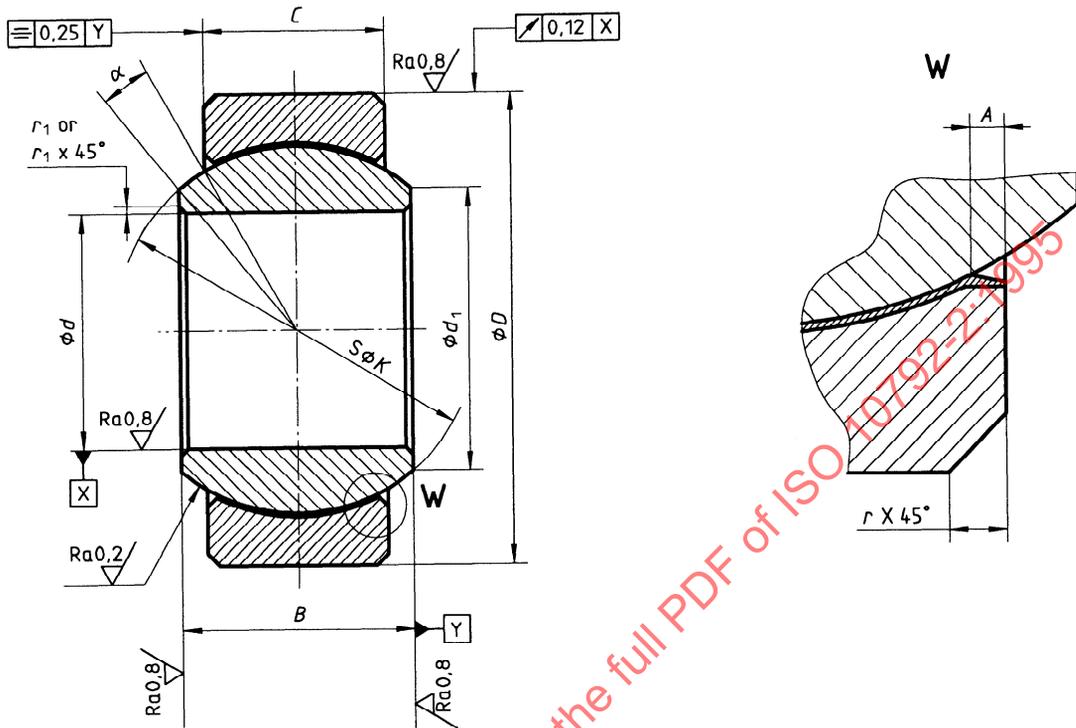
Spherical plain bearing with self-lubricating liner without face groove
